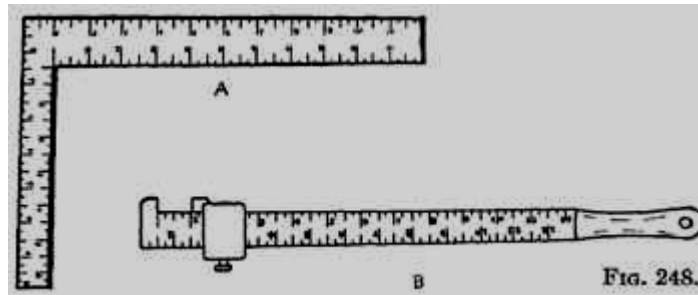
Metal measuring tools should be used in blacksmithing. (A). The small steel square is very useful for checking bends and angles as well as for measuring. (B). The caliper rule is especially good for measuring the diameter or thickness of bolts, rods, and bars; as well as for general measuring.
